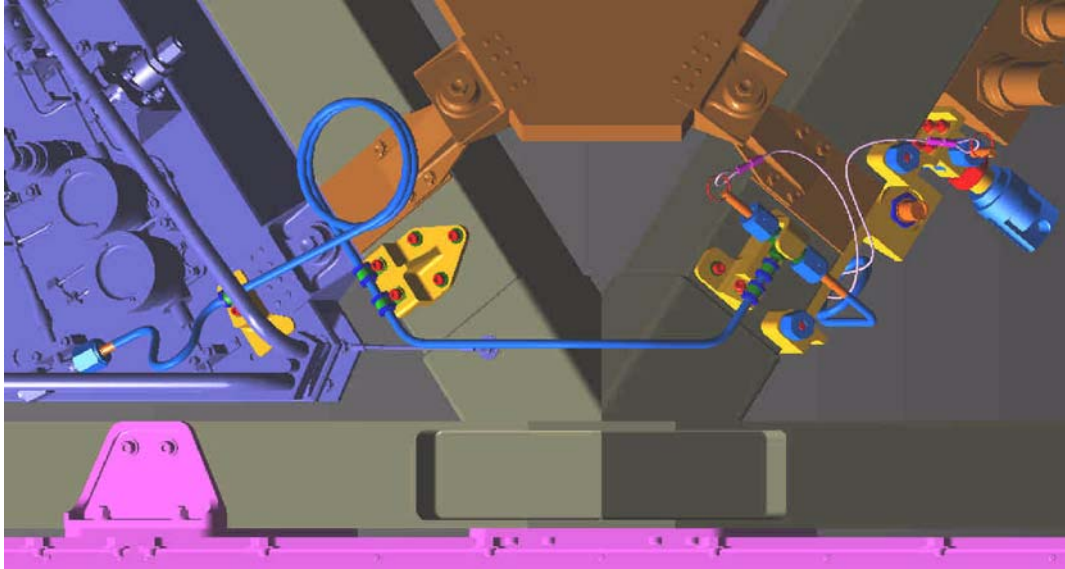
A Bottom View of the GMA Showing the Supply Tanks and Outlet Valves
